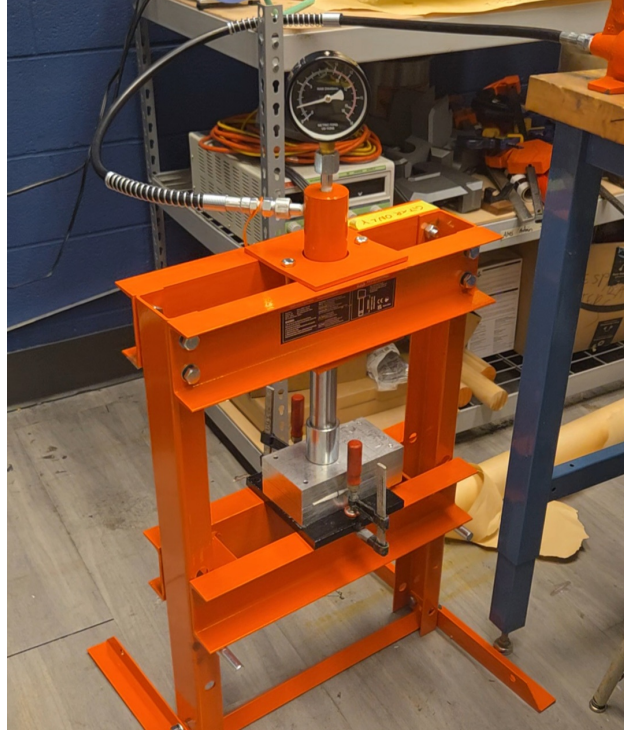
Hydraulic press setup used to apply compressive force to the heated mold assembly.
